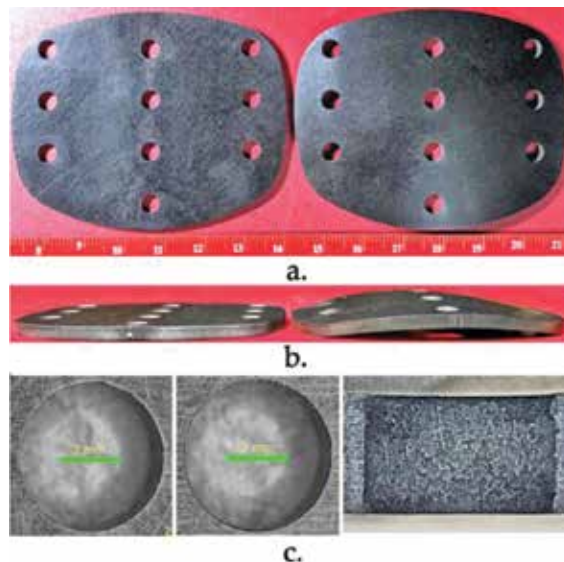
AWJ-machined cranial implants made from PEEK with fiber reinforcement (a) Top view (b) Side view and (c) Top, bottom, and side view.
